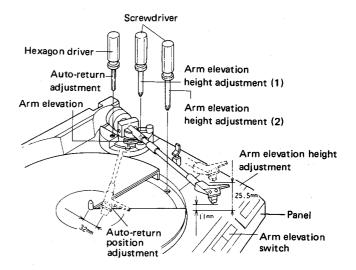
Arm elevation height adjustment and auto-return adjustment
